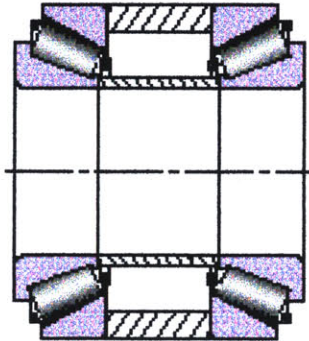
Indirect mounting of two-row tapered roller bearing. Source: The Timken Co.
